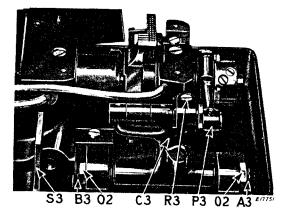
Alignment of Feed Dog in Throat Plate Slot
